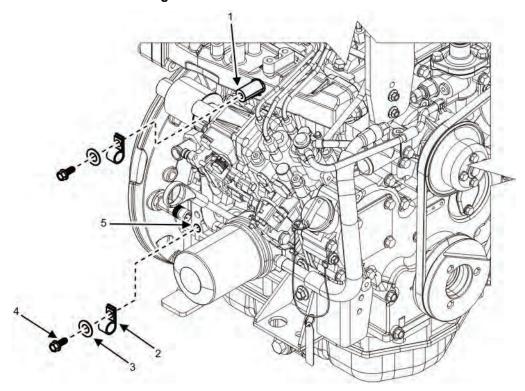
Electrical Connectors Clamp Intake Side — Removal.
